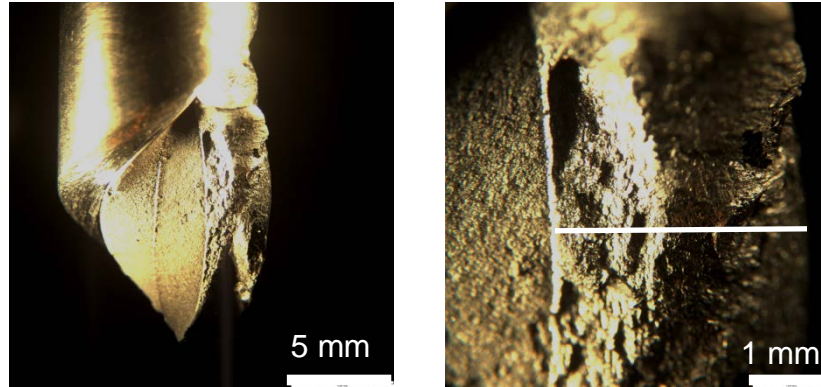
Optical images fracture surfaces of X80B5: (a) lower mag; (b) higher mag.
